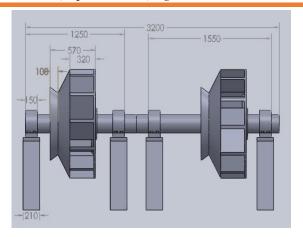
, Shaft, Impeller and Cushion Assembly (front view)
